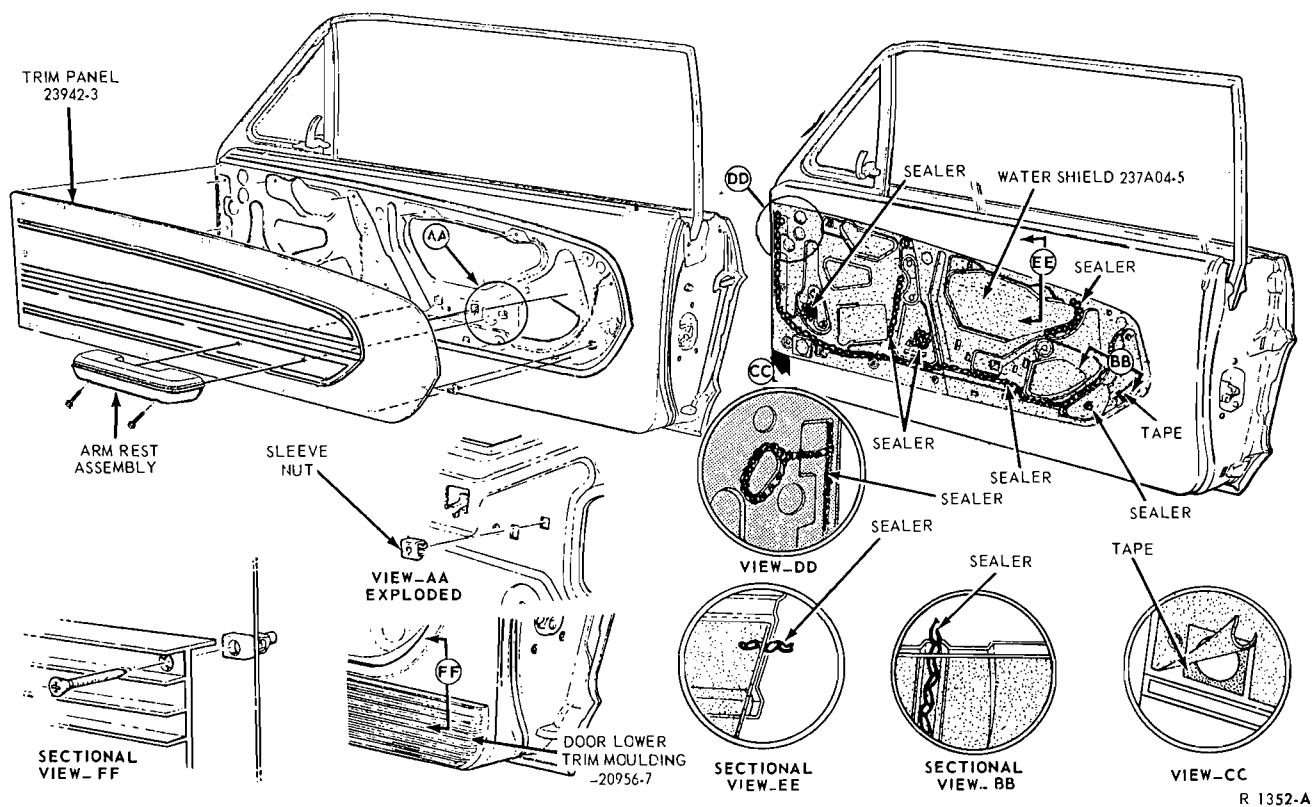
Typical Door Trim Panel and Water Shield—Mustang
